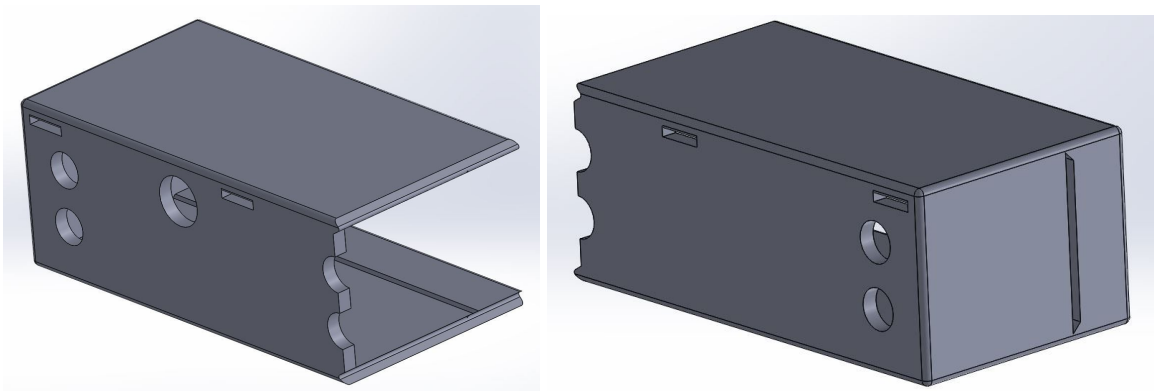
Solidworks model of the side sensor housing halves for the final prototype.
